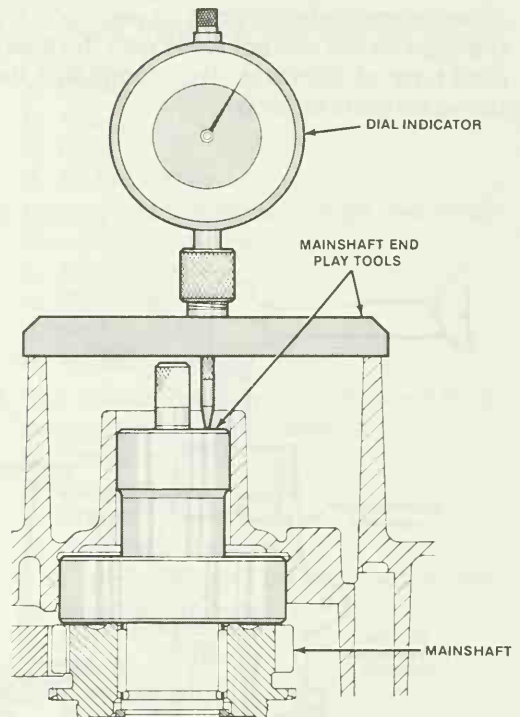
Mainshaft end play is measured and corrected with shims on the mainshaft. (Chrysler Corporation)
